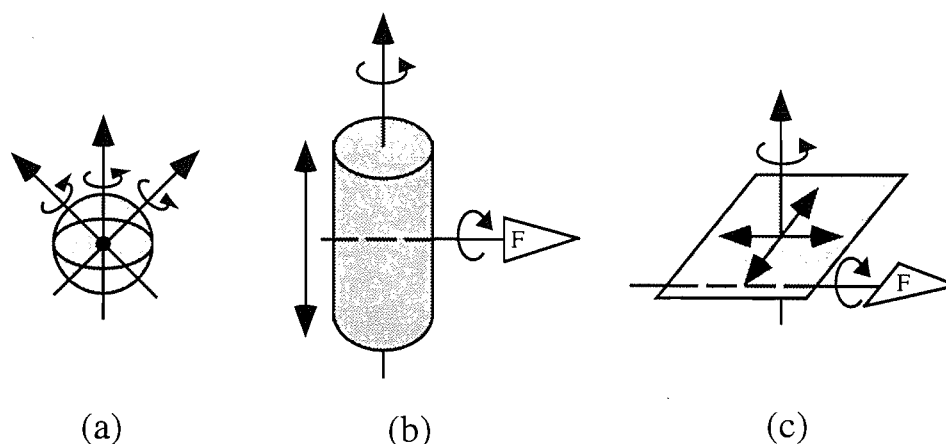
(a) A single sphere fixture, (b) A single cylinder fixture, (c) A single plane fixture.
